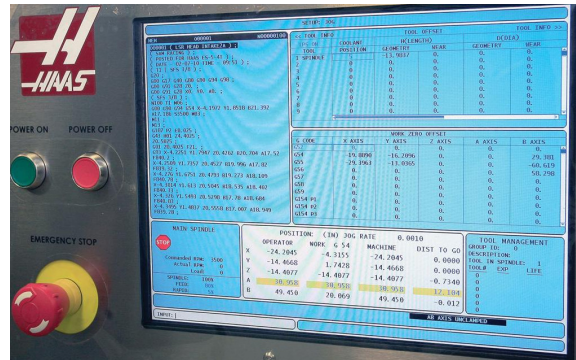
A current user interface for a 5-axis CNC milling machine.
